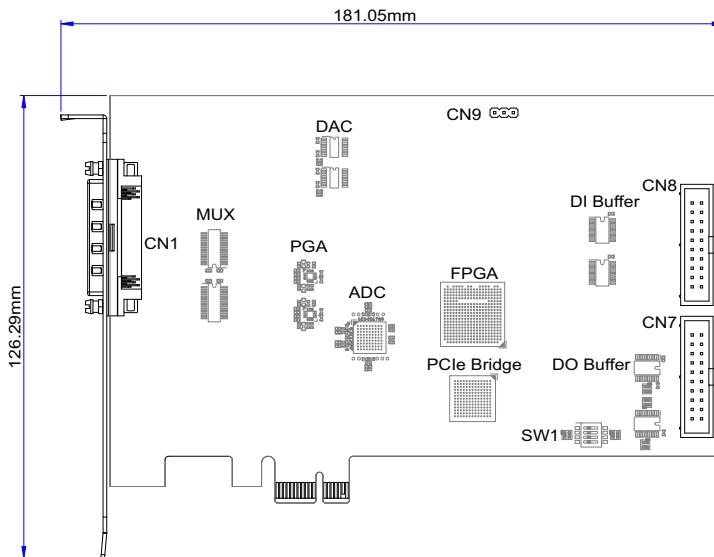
PCIe-9161/9163 PCB Front Layout
